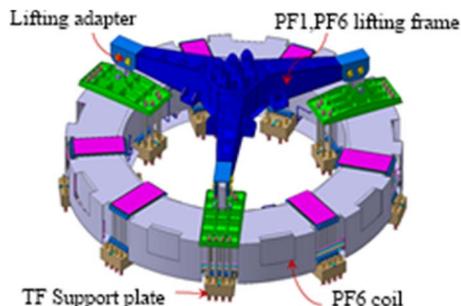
PF6 coil with its lifting frame and adapters bolted to the TF support plates.
